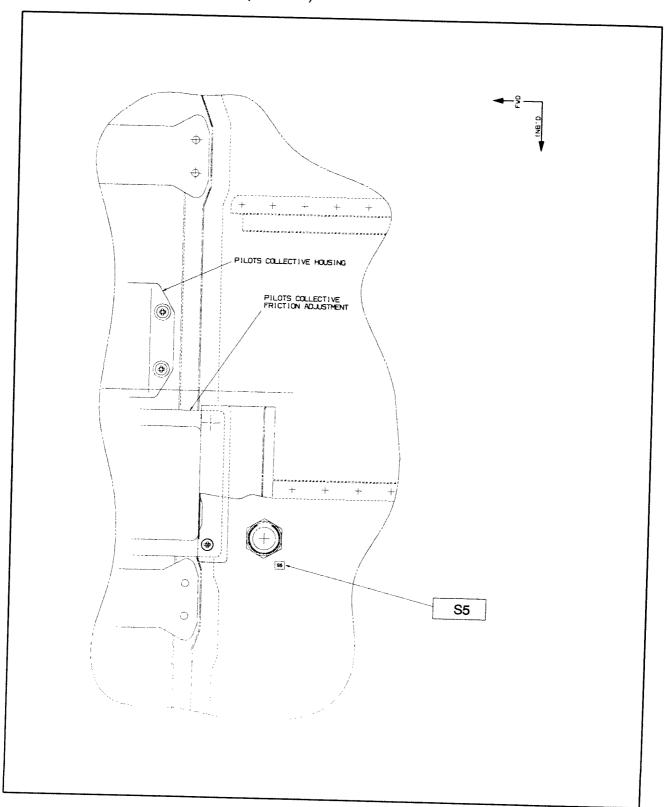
View showing label location on Cabin Floor for installation with SLASS
